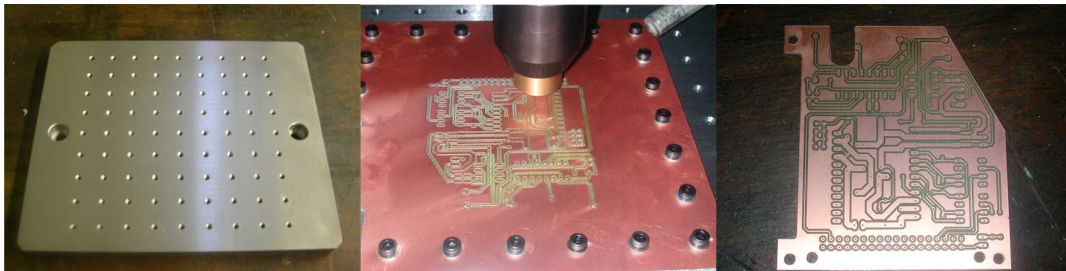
BOARD MANUFACTURE: PRODUCTION
